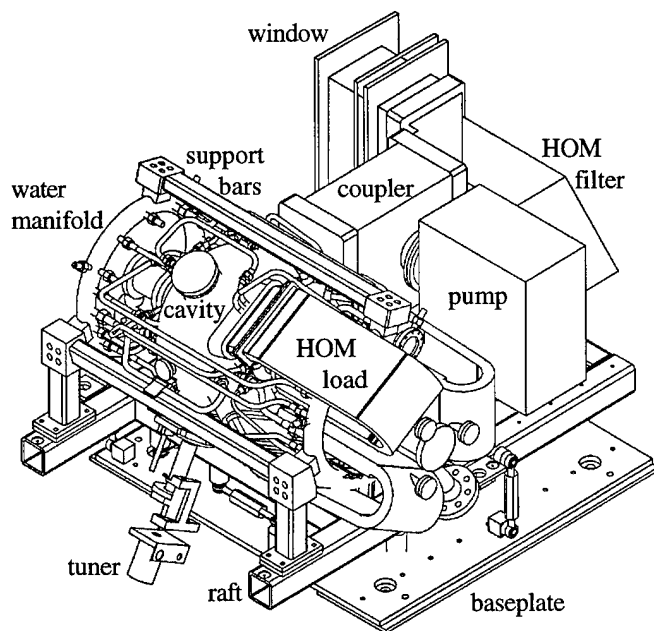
Cavity, coupler, window, tuner, pump and HOM loads mounted on raft for installation
